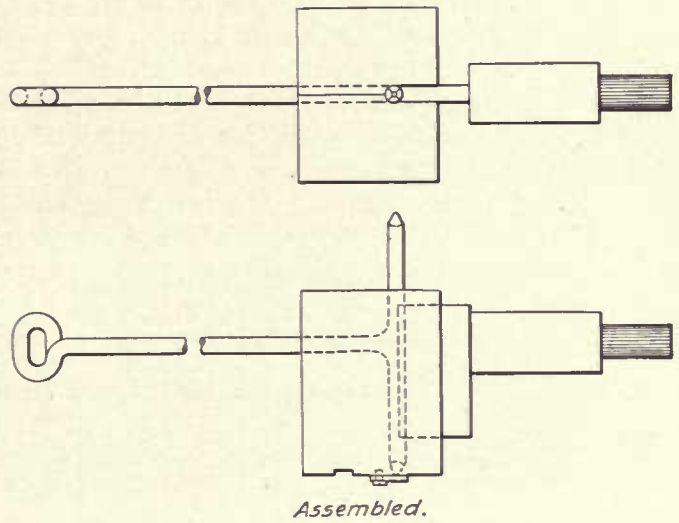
Dies for Welding Fork on Clinker Rakes.
